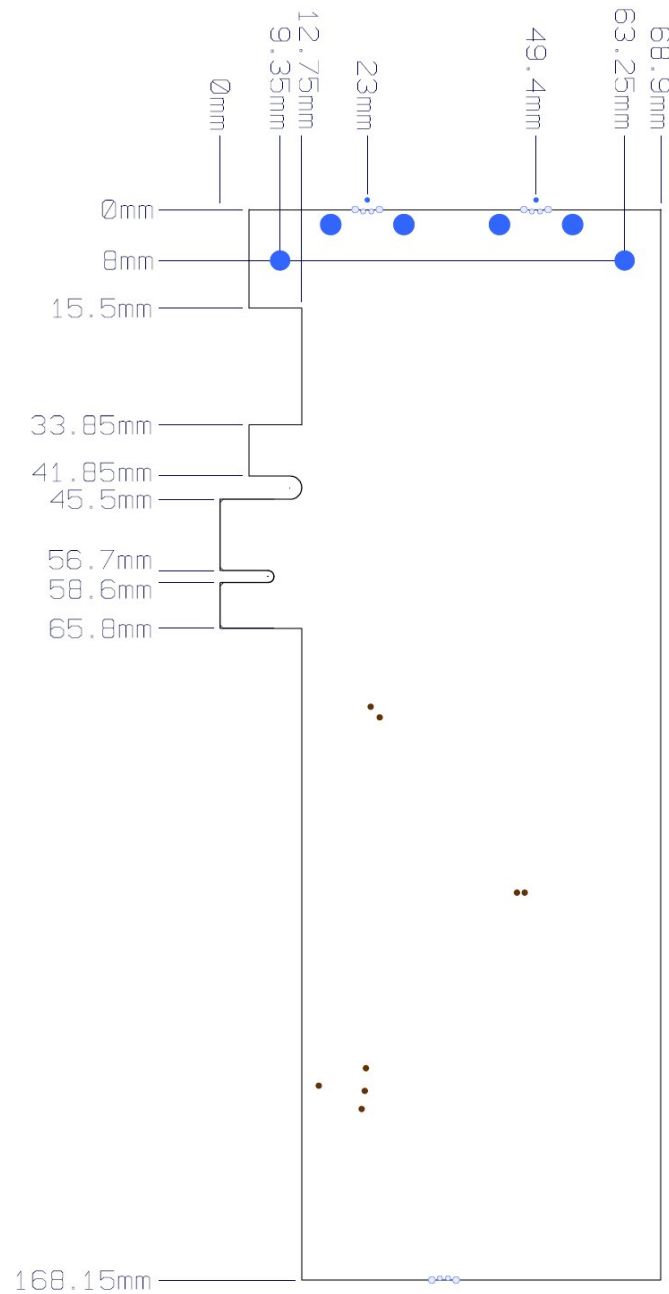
PCIe Medical LAN Card -PCB - mechanical dimensions
